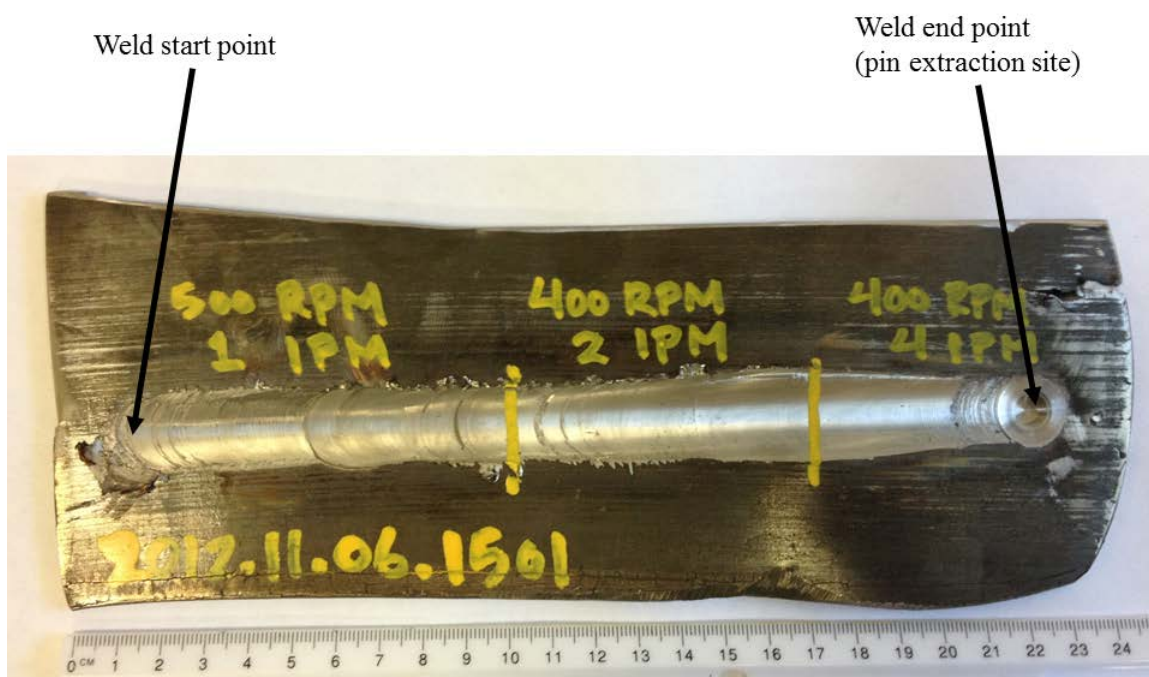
Example of a MA956 friction stir welded plate used in this research. Due to limited availability of MA956, single bead-on-plate runs with varying welding conditions were performed on individual plates.
